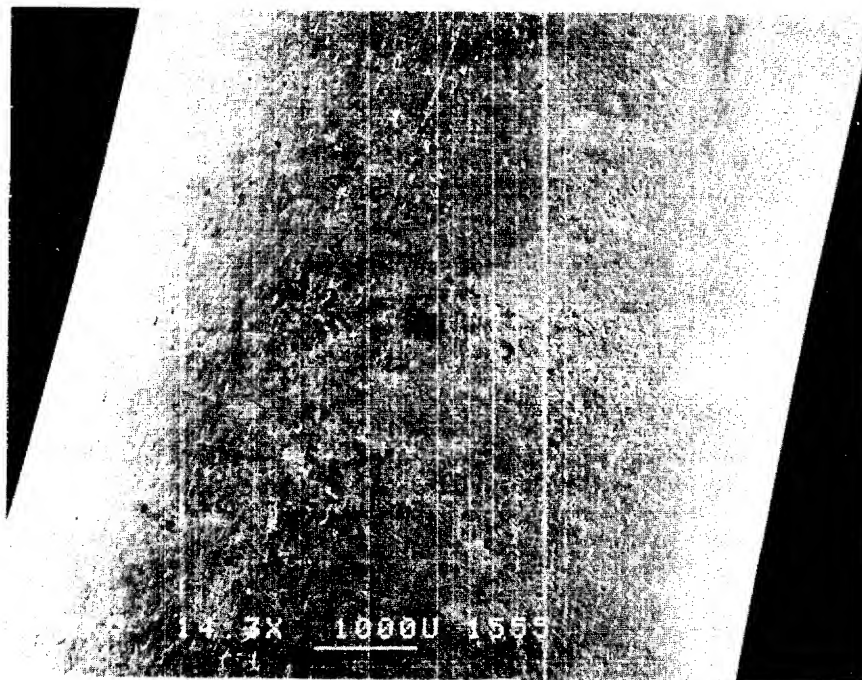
Surface of Warm-Formed Rod in Straight Section (14.3X)
